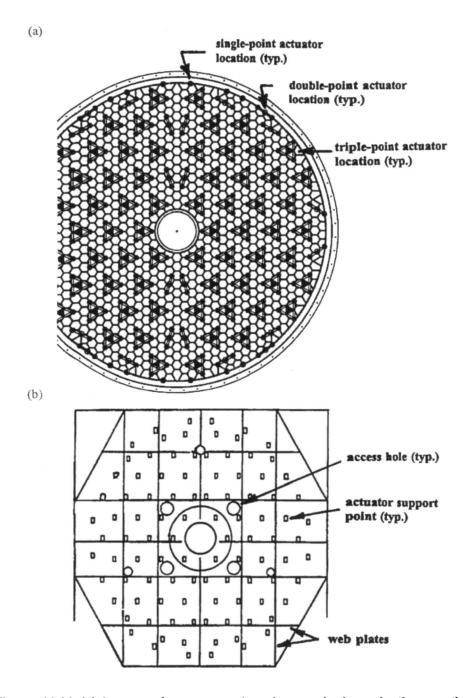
(a) Layout of support points (some single and others acting through double and triple load spreaders) on a portion of the MMT honeycomb mirror substrate. (Adapted from Gray et al.⁴⁴) (b) Section view B-B' from Fig. 11.65 passing through the support mechanisms. (Adapted from Antebi et al.⁴³)
